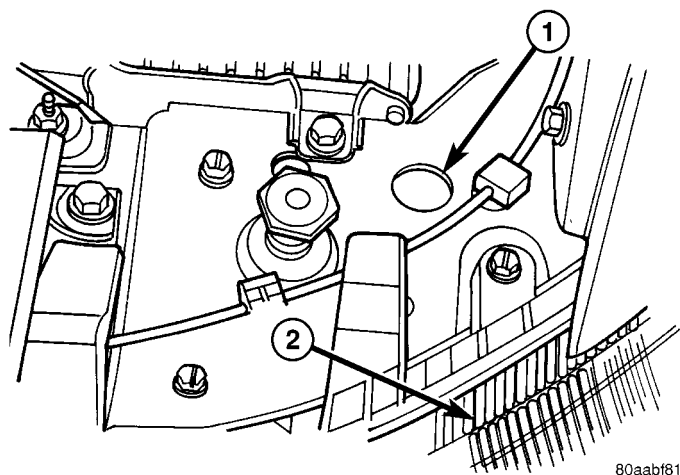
HEADLAMP UNIT ADJUSTMENT
